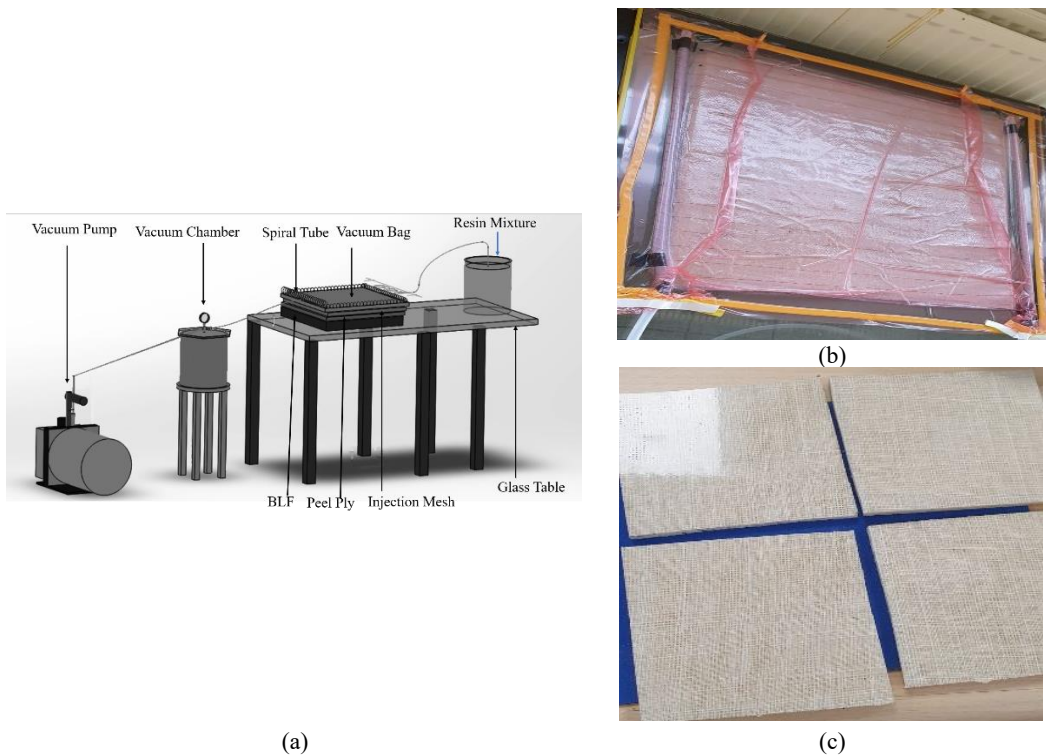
VBRTM experimental bench details: (a) Schematic view; (b) moulding section; (c) final GBC material.
